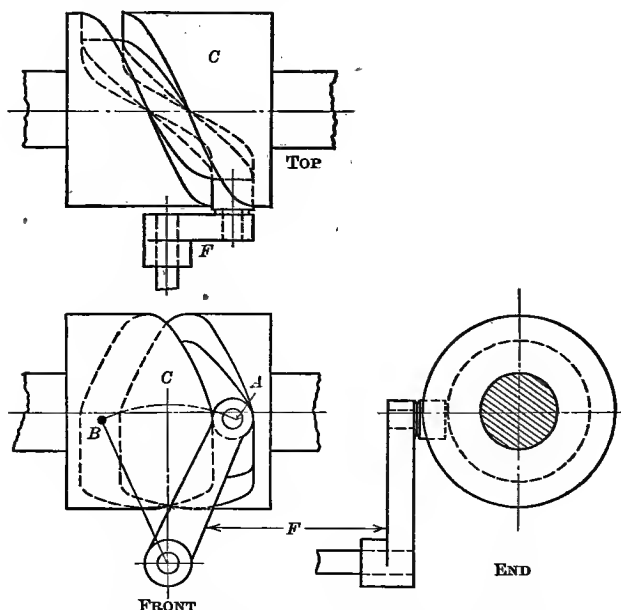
CYLINDRICAL CAM AND SWINGING FOLLOWER
